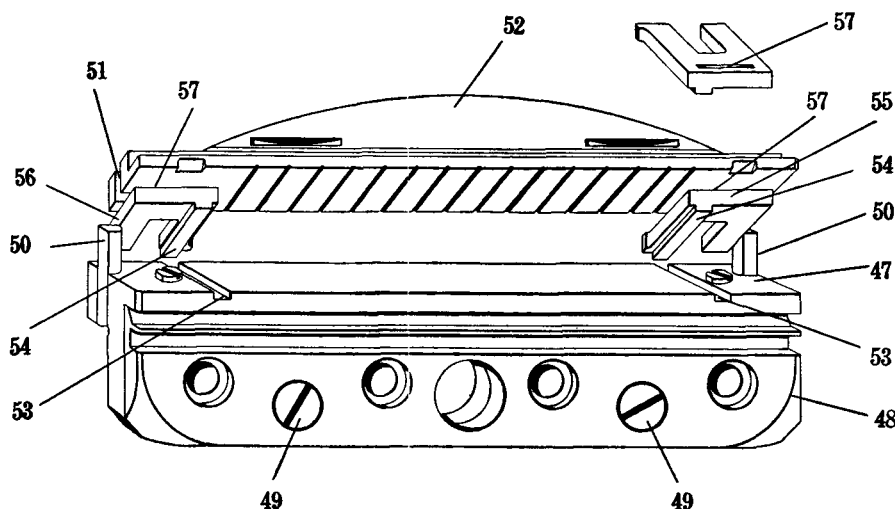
View of the mold. 47 is the mold body. On this mold body is a separate piece 48 having a groove in it. This is called the "keeper." The keeper is fastened to the mold by screws 49. The mold is fastened to the disk by four screws, the holes for which are shown. At each end of the mold body are two upright posts 50. These posts fit into two notches 51 at each end of the mold cap 52. The mold body has also in it two grooves from front to rear 53. These grooves are for the purpose of affording a seat to a projecting rib 54 upon the liners 55 and 56.
